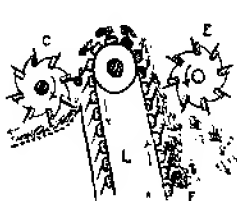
ILLUSTRATING USE OF EASIER ROLLER AND STRIPPING BEATER
